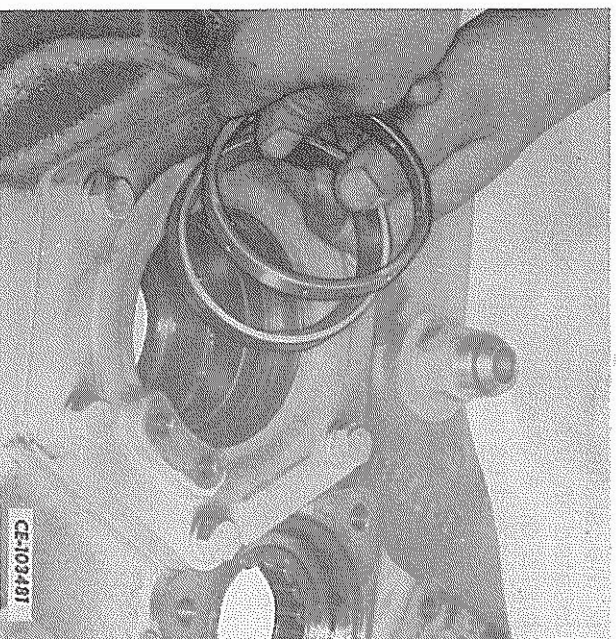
Removing the Pinion Shaft Front Bearing Cup Spacer and Inner Cup
